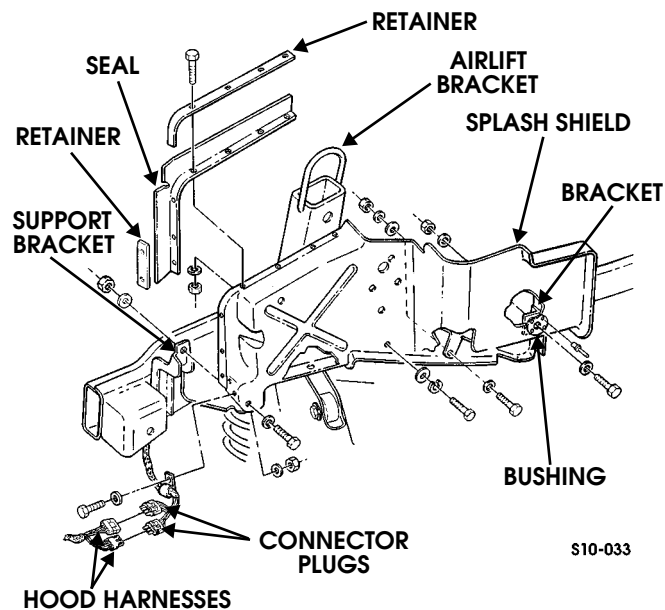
Engine (Left) Splash Shield Assembly Replacement
